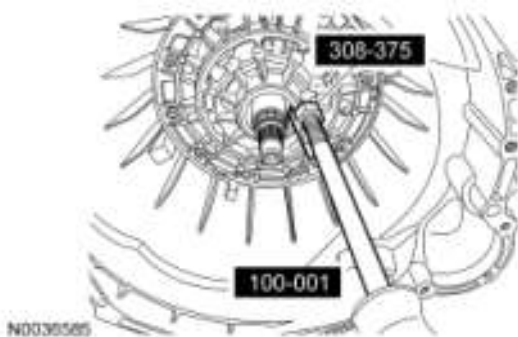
Removing Front Pump Seal Using Special Tools (100-001, 308-375)
